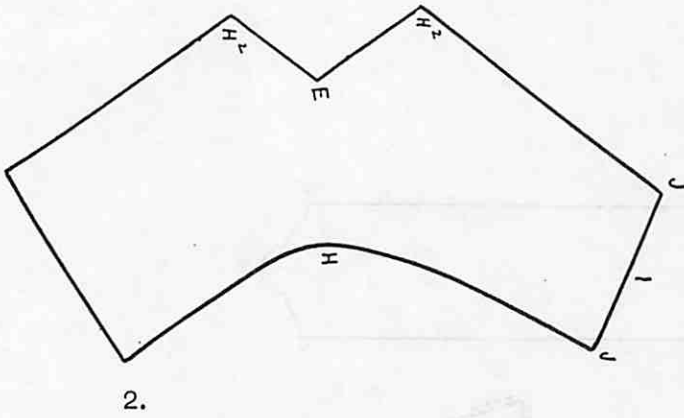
This being folded down the line EI, and cut out true to the front edge, and where the overlapping pieces E H 2 cross, produces the shape as shewn. The seam H 2 E is then made by machine; this then produces a tongue which fits straight into the boot, as Figure 4.
